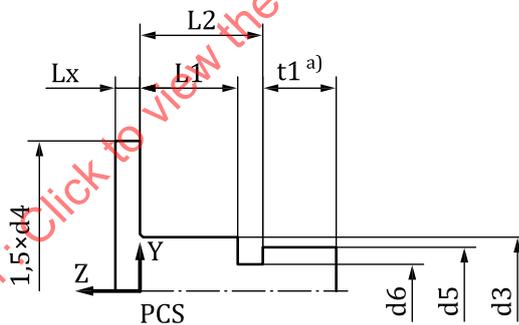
(#) shows the sketch of the connection for the use on full or half side face milling cutters with the use of a nut on milling machine arbours.
